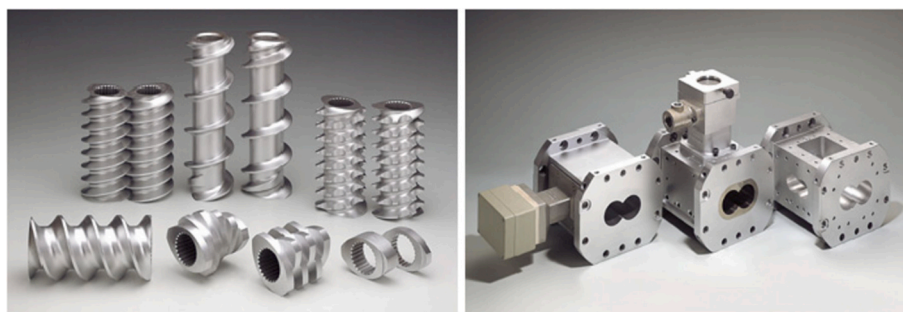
Screw types that are assembled on high torques splined shafts (left) and flanged barrels electrically heated and liquid cooled (right).
